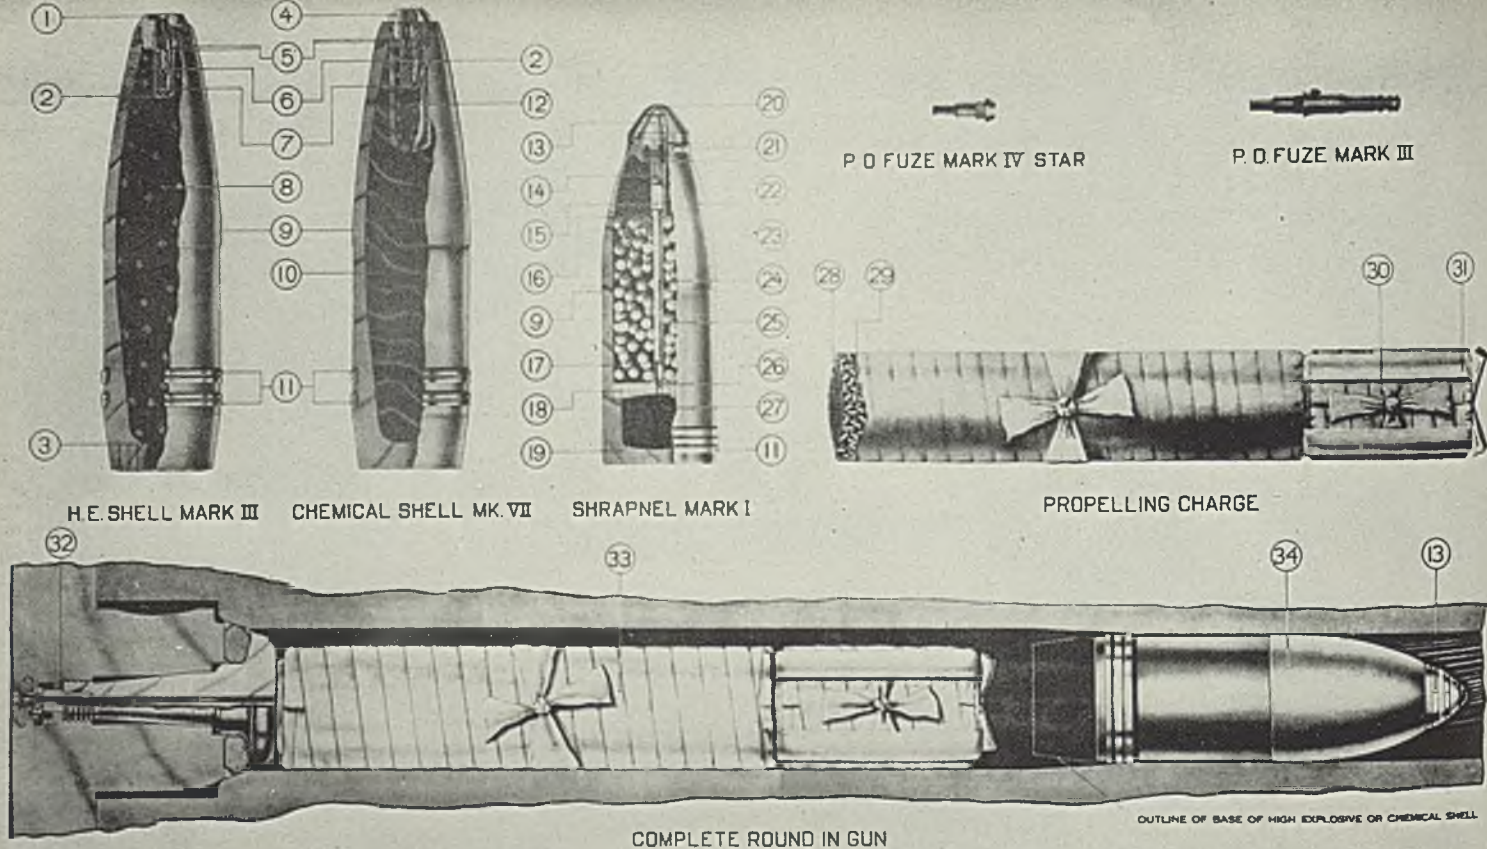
This shows three types of 155-millimeter ammunition—high-explosive shell, Mark III; chemical shell, Mark VII; shrapnel shell, Mark I—with propelling charge, two types of fuzes, and view of complete round in the gun (bottom). Parts are: 1—Adapter and booster, Mark III A; 2—booster casing, Mark III; 3—base cover, lead disk and caulking wire; 4—adapter and booster, Mark VI B; 5—washer (felt); 6—fuze socket; 7—tetryl; 8—TNT; 9—bourrelet; 10—gas; 11—rotating band; 12—TNT (Grade No. 1); 13—45 sec. comb. fuze; 14—inner tube; 15—retainer; 16—matrix cover; 17—matrix; 18—diaphragm; 19—case; 20—fuze cover; 21—tear strip; 22—washer; 23—head; 24—flash tube; 25—ball (lead); 26—powder tube cup (fiber); 27—black powder; 28—igniter (base section); 29—smokeless powder; 30—increment section; 31—tying strip; 32—21 gr. percussion primer; 33—propelling charge; 34—shrapnel, Mark I
